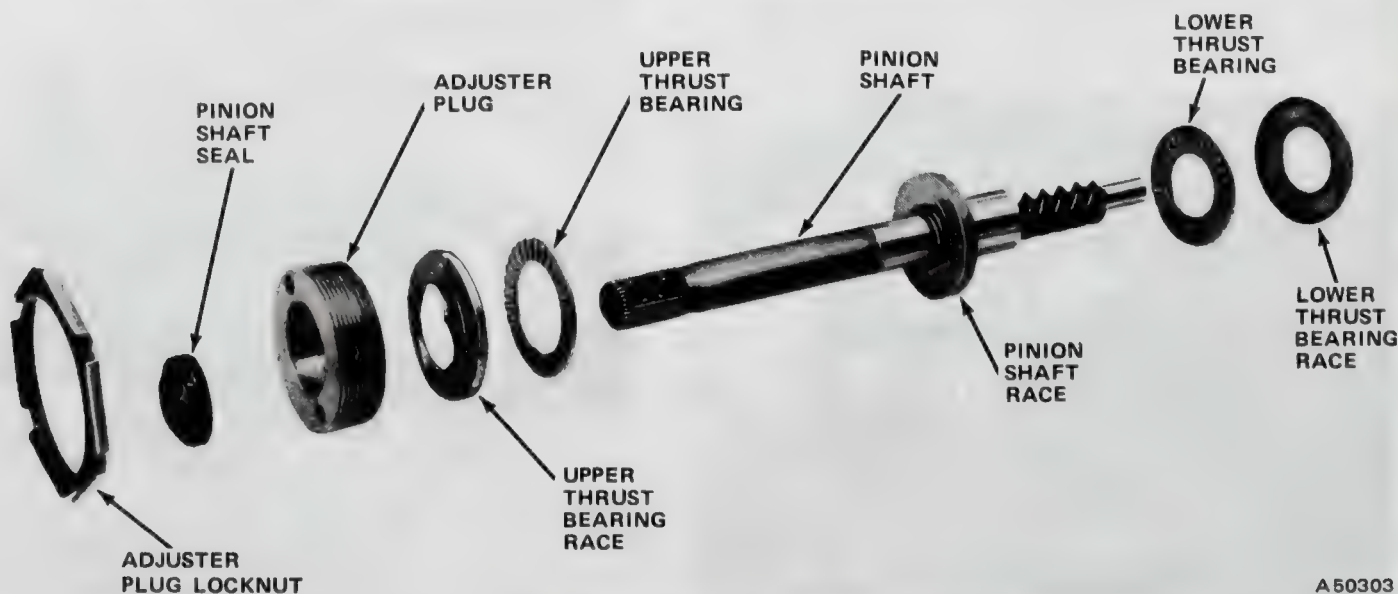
J-24 Pinion Shaft Bearings and Adjuster Plug Assembly
